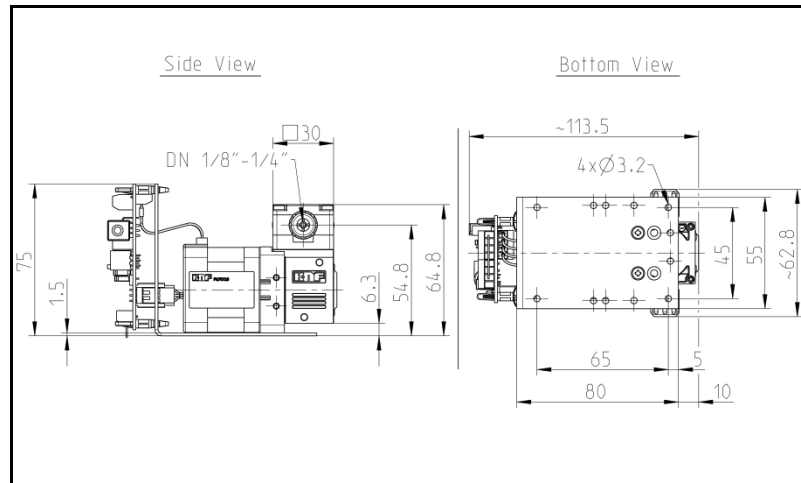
Mounting dimensions UFEM 1.09\_.55 RC
